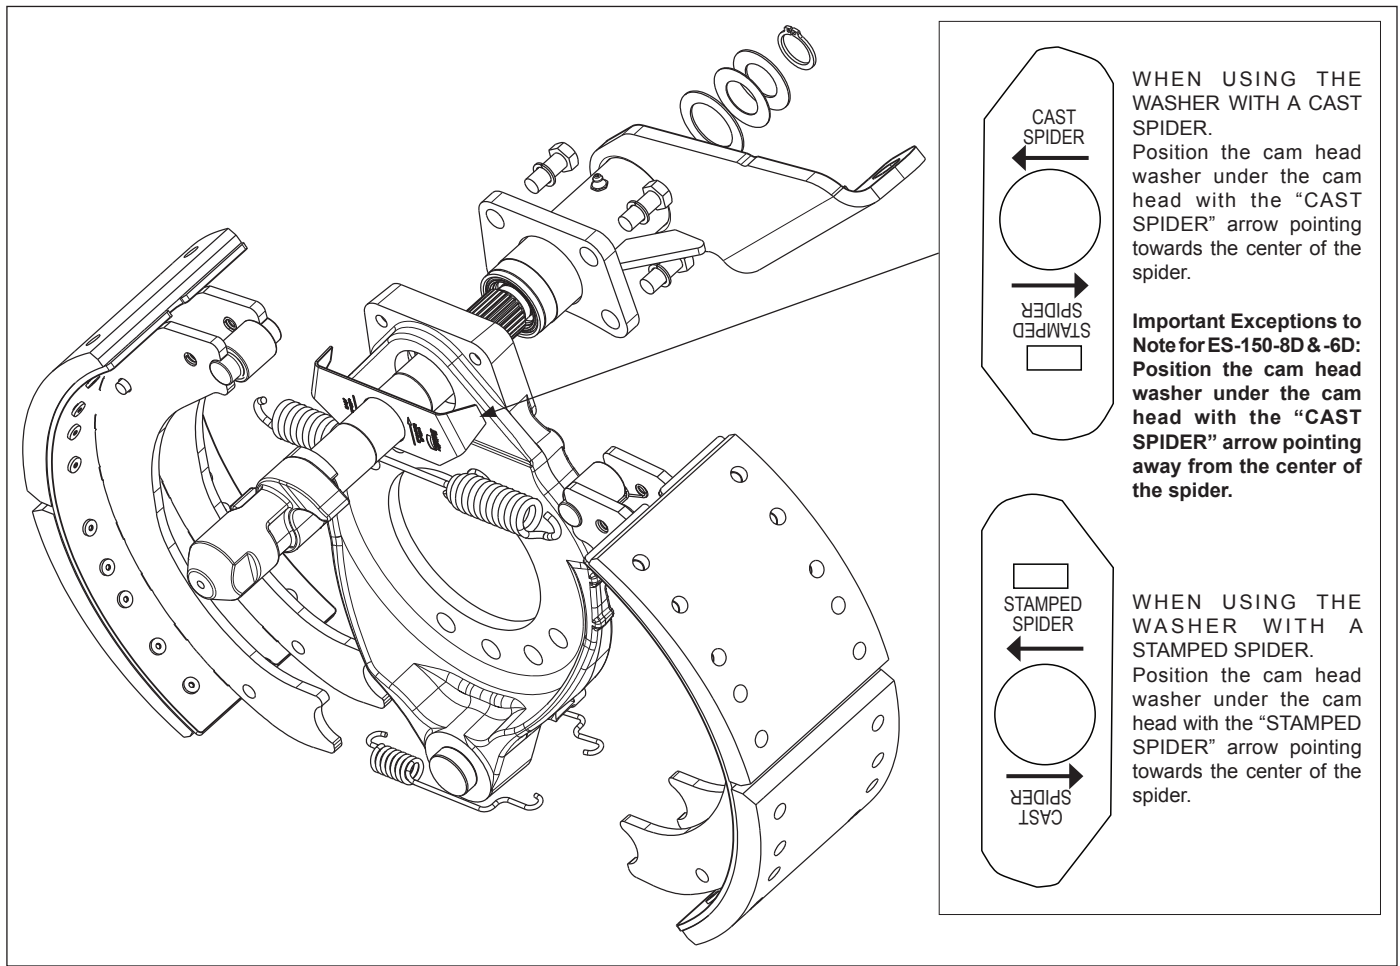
Typical Brake Exploded View with Inset Showing the Cam Head Washer Orientation
